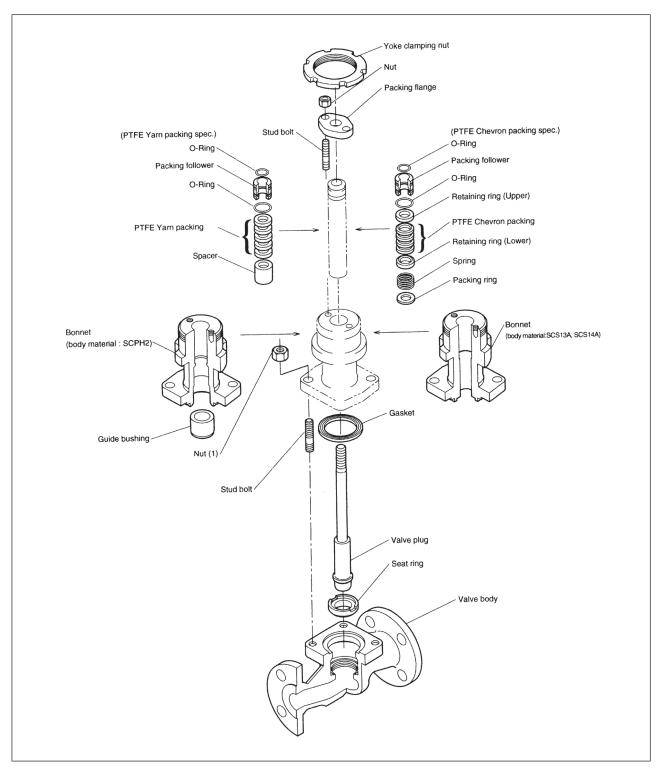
Model AGVB Control Valve (Available body sizes: 1/2 inches, 3/4 inches, 1 inch)
